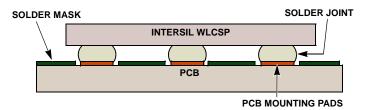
INTERSIL'S WLCSP MOUNTED ON PCB
